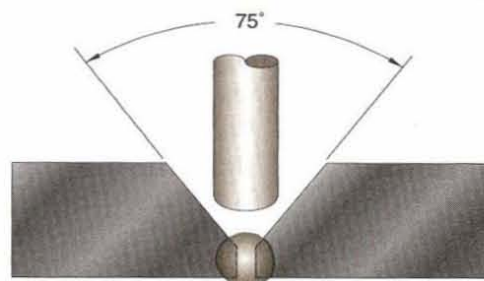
A pipe weld requires a wide 75° groove angle.
